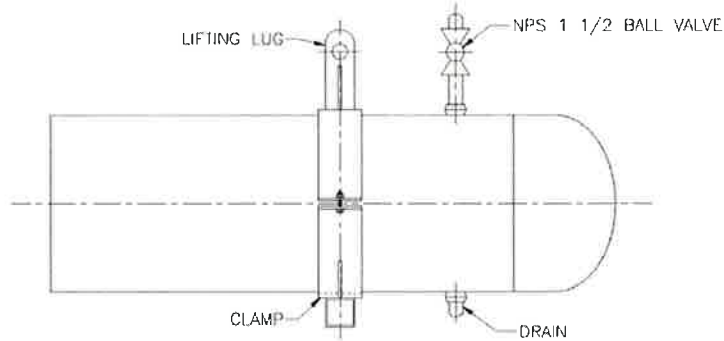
Sample Short Test Cap Layout (NPS 12 to NPS 48)
